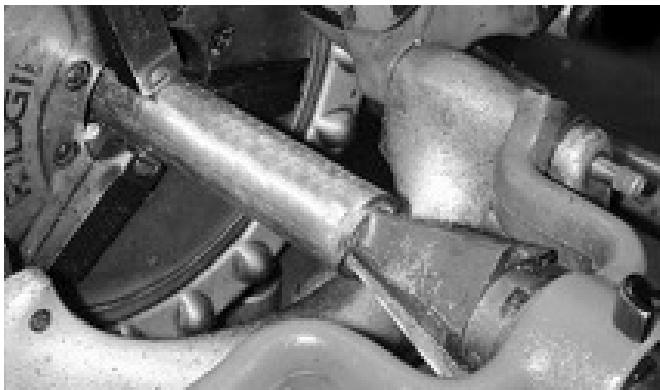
Insert the (flute) reamer into work piece and rotate until burr is removed.
